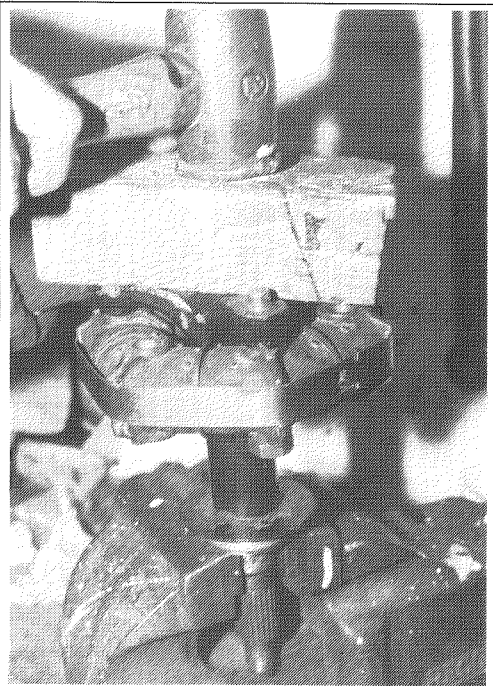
Turn the shaft over and supporting the inner hub over the jaws of a vice tap fully home.
